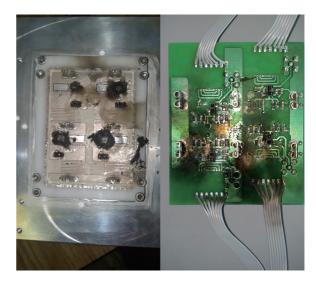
Destroyed SiC power module (left) and gate driver board (right) due to EMI coupling back into the gate drivers and falsely triggering a power device leading to a shoot-through condition.
